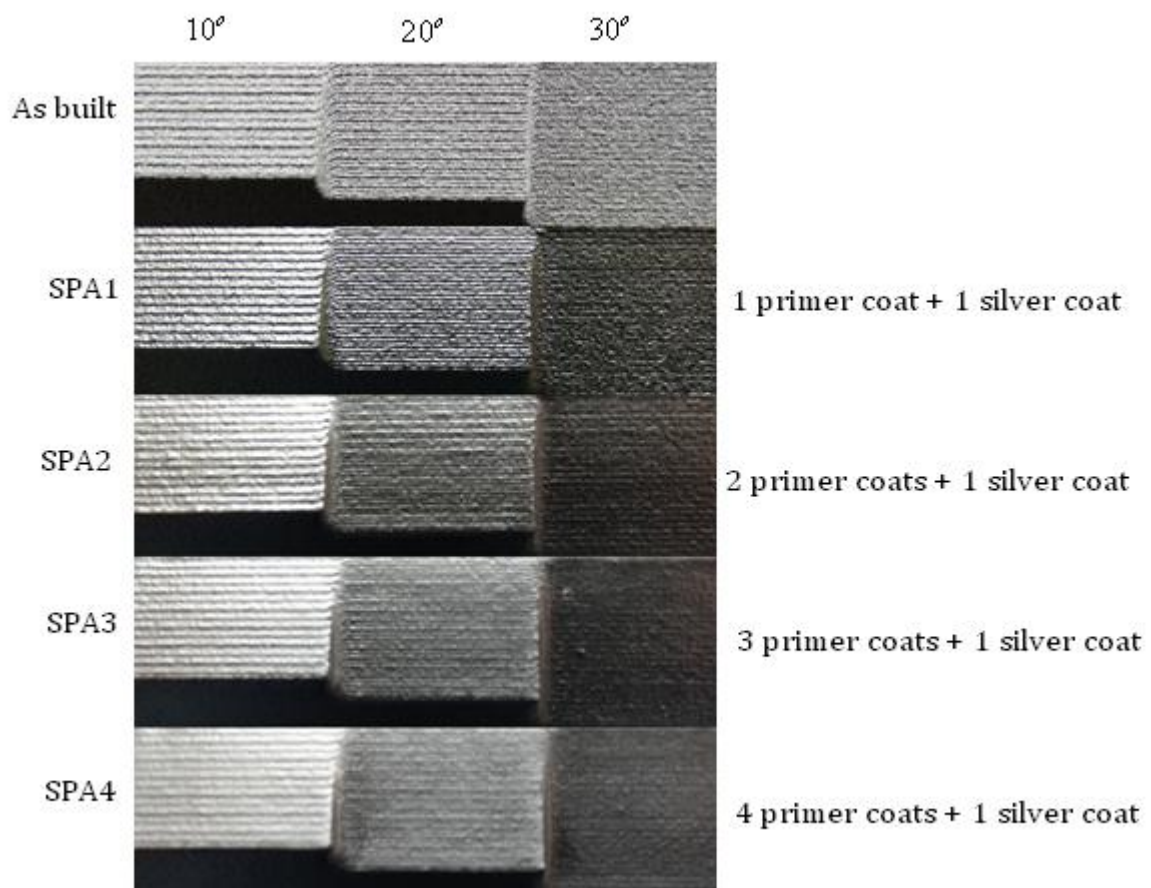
Surface finish improvement of Alumide® test pieces by spray painted
